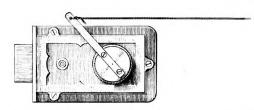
Showing Night Latch with Small Lever Riveted to Knob for Purpose of Opening Door with a Cord from a
